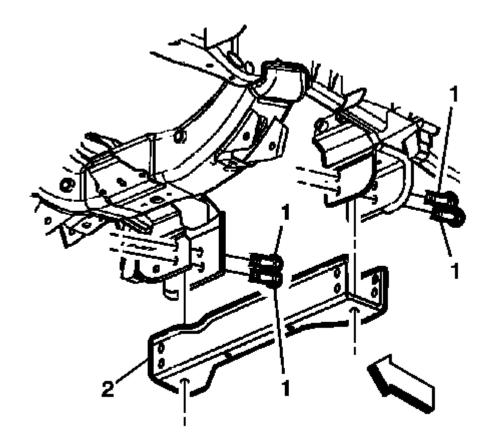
View Of Crossbar Bolts & Bar (2WD) Courtesy of GENERAL MOTORS CORP.
